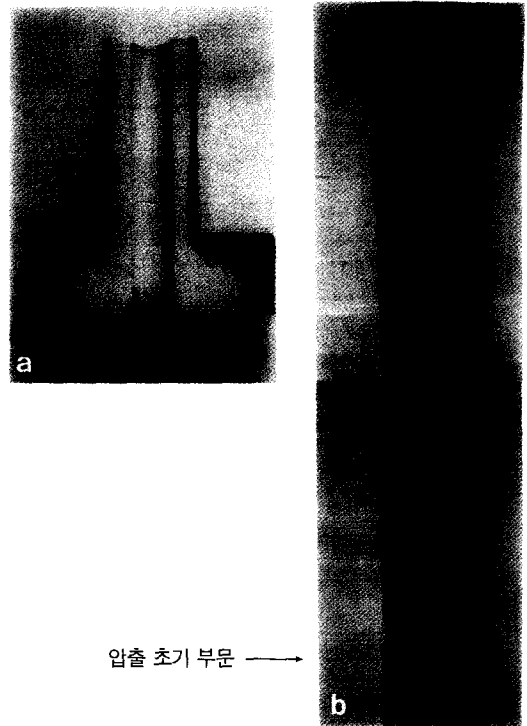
Cross-sectional view of (a) cladged ingot and (b) extruded tube (clad thickness : 5 mm)
